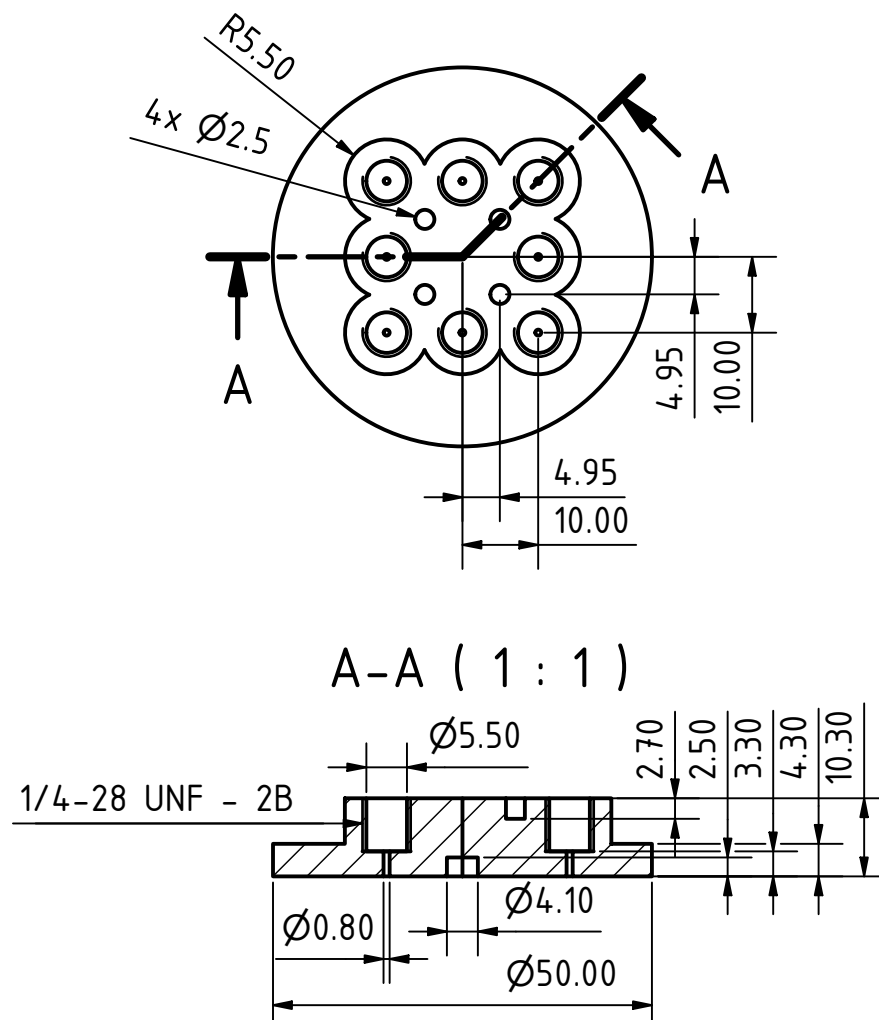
Technical drawing of the rotor of the upscaled valve: top view (top) and section view (bottom) with scale 1:1. The four recesses in the surface can be used to mount a motor adapter and turn the rotor automatically. All threads were cut after printing, all dimensions in mm.
